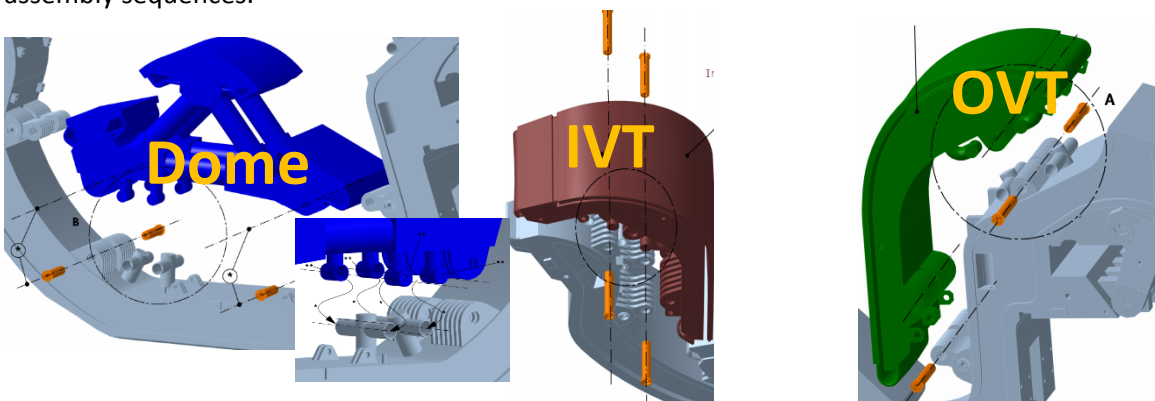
Mounting and Welding Cooling Pipes of Dome, IVT and OVT on CB
